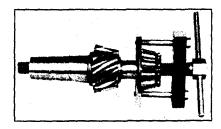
Removing Pinion Rear Bearing with Puller 93229
